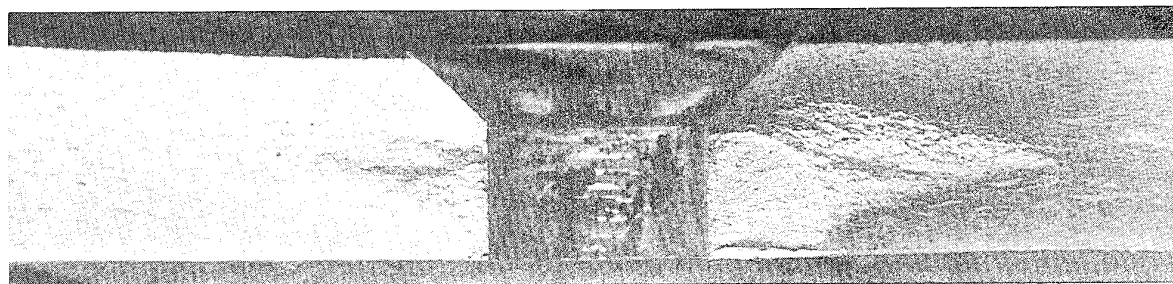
Corrosion attack in countersink edge under cracked paint system
